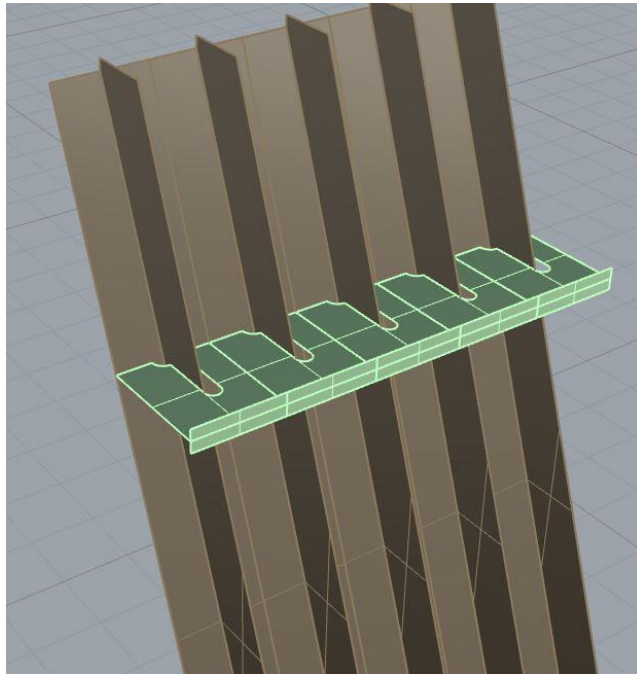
Welded One Side Connection - Isometric View
